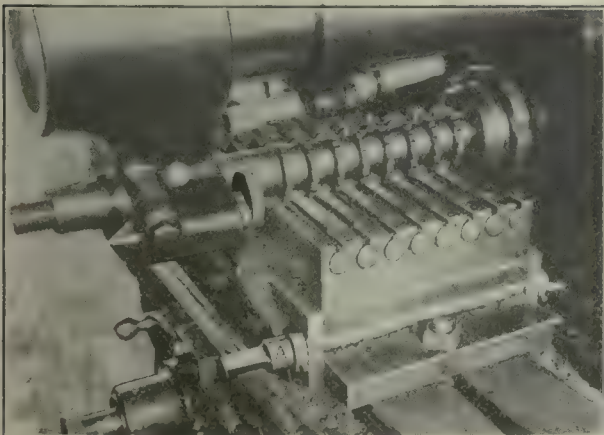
MILLING VALVE ROCKER-ARM SHAFTS
